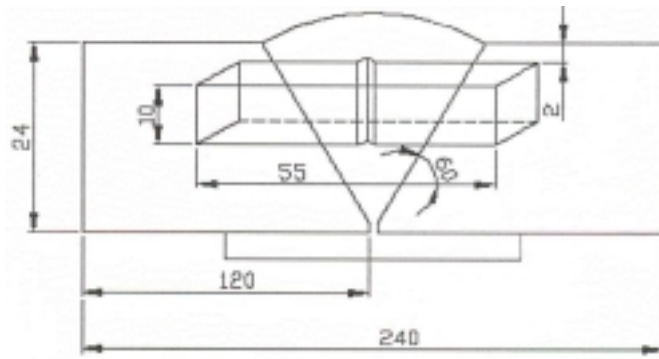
Schematic diagram of Charpy V notch impact test specimen in the weld joint geometry (unit:mm)
